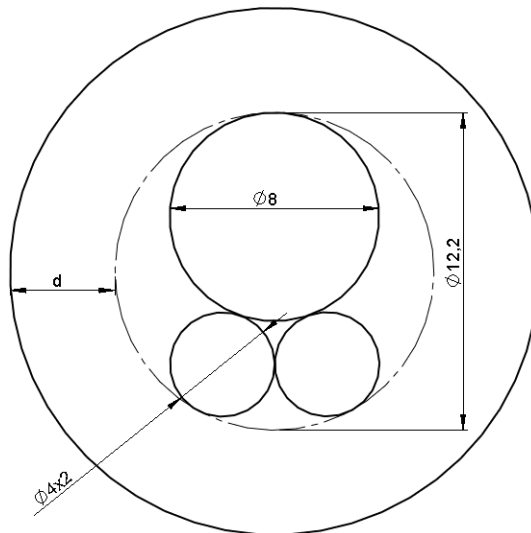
Section of a structural cable with an electric cable and two tubes of gas.
